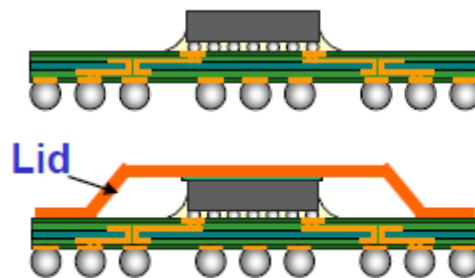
Representative Illustration of a Flip-Chip BGA Package
